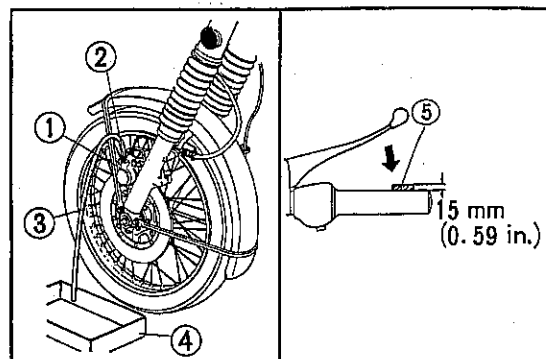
① Caliper ② Bleeder ③ Bleeder hose ④ Drip pan ⑤ Rubber
